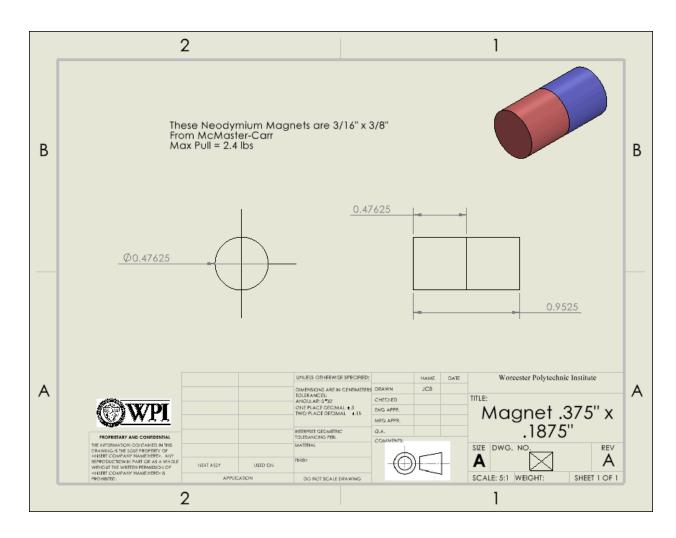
CAD Drawing schematic for the side magnets which were used in the final prototype of the cap.
